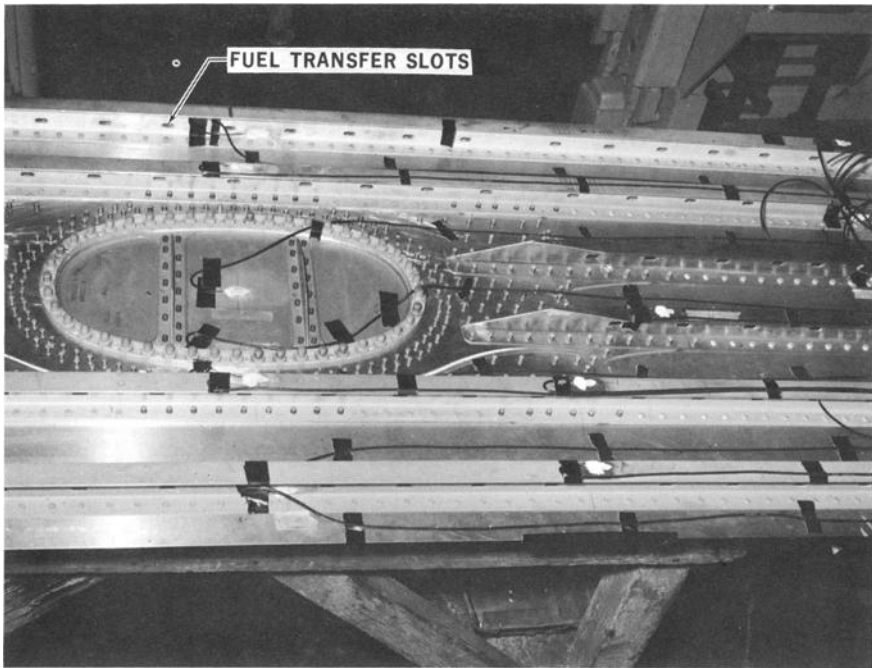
Fatigue test specimen of DC-9 lower wing skin access door.
